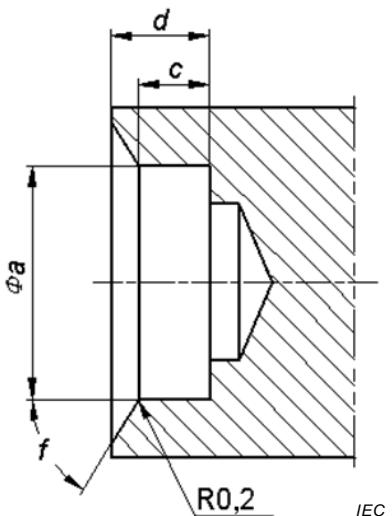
Gauge C for retention test for pin connectors – Smooth bore
